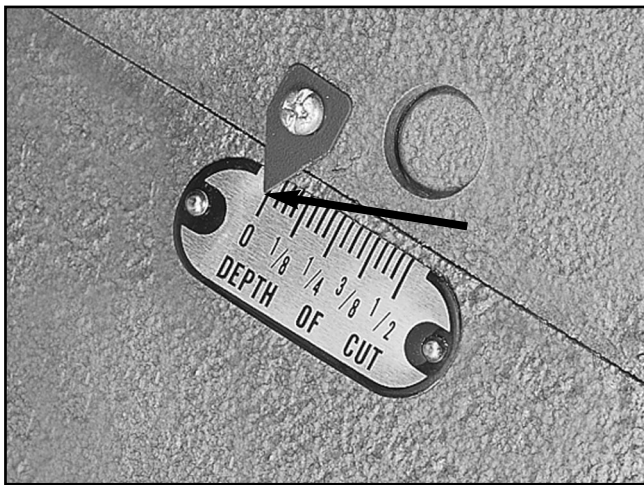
Depth-of-cut pointer adjusted to "0" position.
